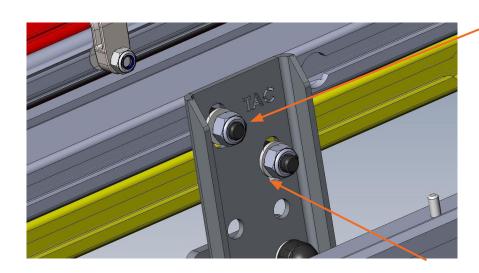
Insert Hex Bolt into the Side Nut Slot of the Canopy Camper Frame
